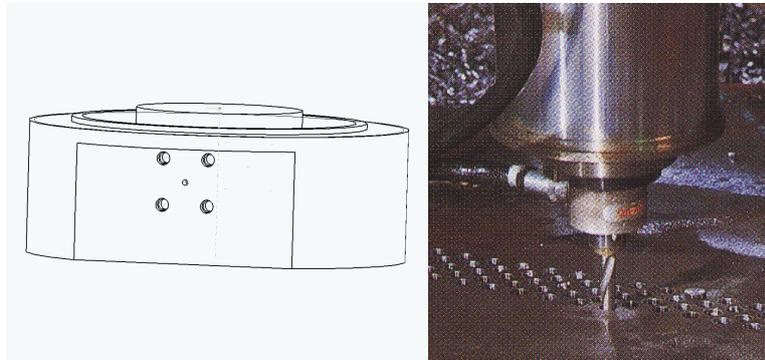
Stage 6: Drilling of the holes and making the threads for the connectors.
